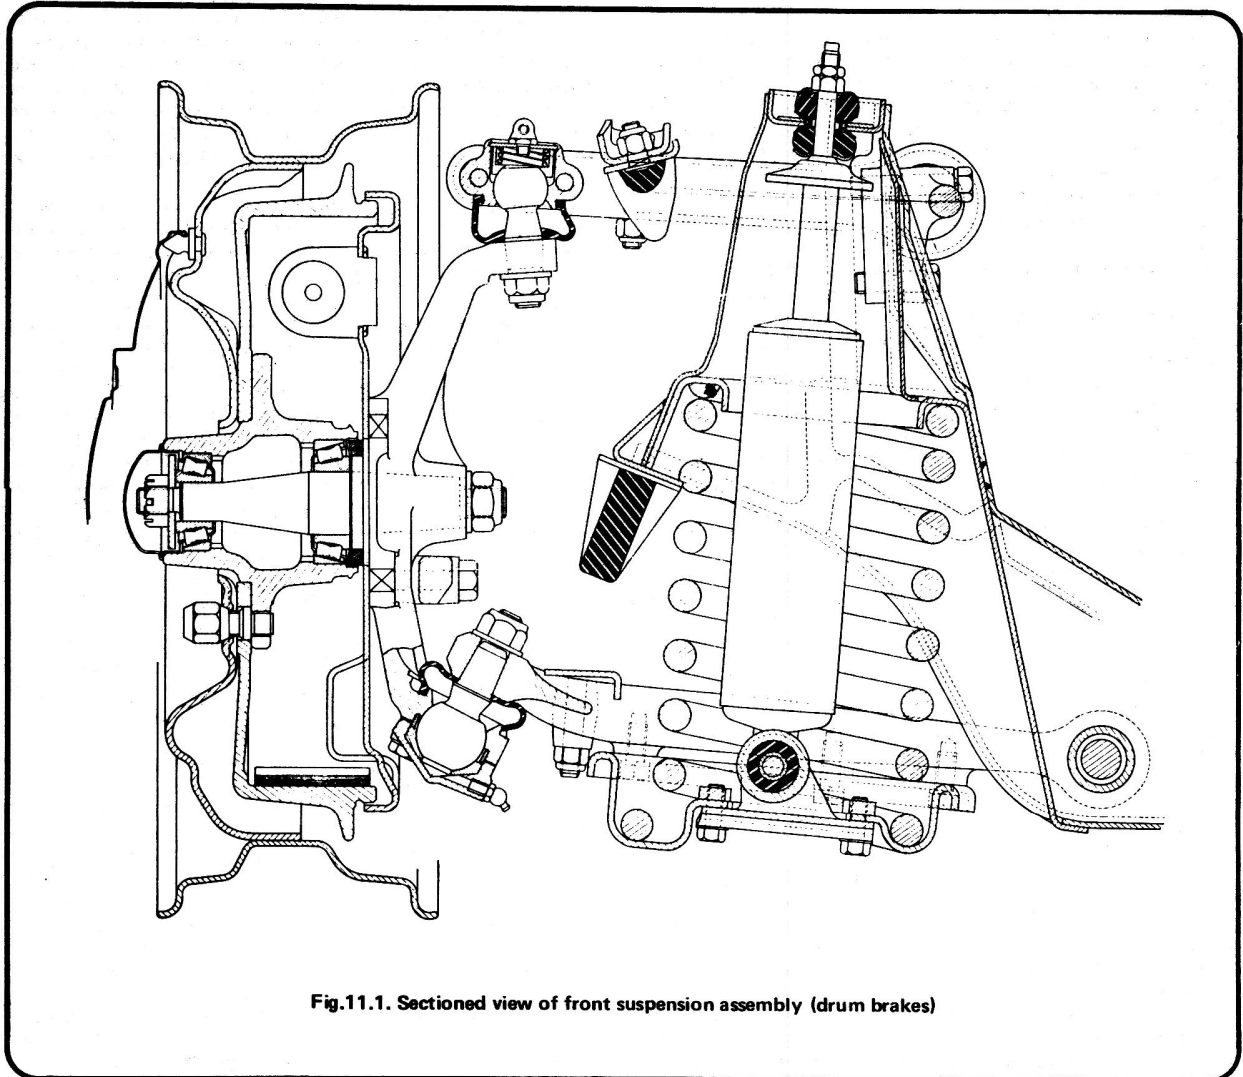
Sectioned view of front suspension assembly (drum brakes)
